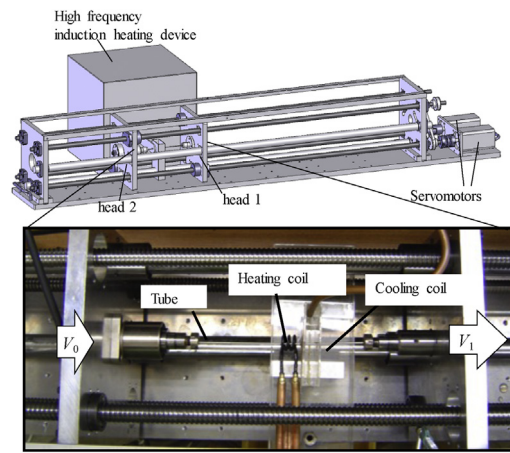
Schematic illustration and photograph of die-less mandrel drawing apparatus.
